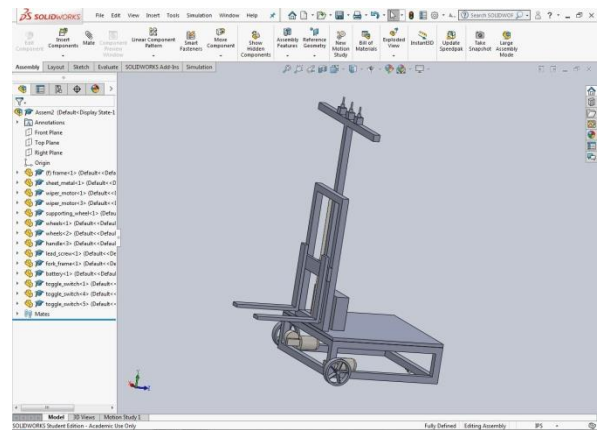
DESIGN OF TWO WHEEL DRIVE FORKLIFT BY SOLIDWORKS
